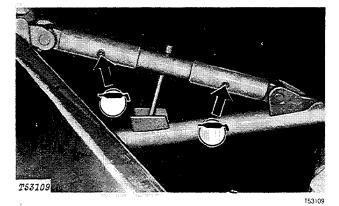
Tilt Adjusting Jacks (Angle Dozer Blade) (4 Points)
